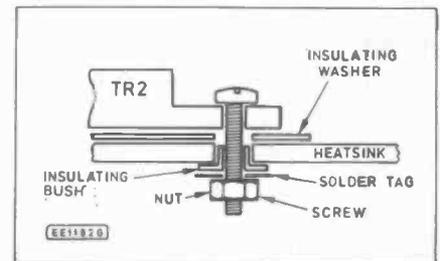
Details of mounting the MOSFET device on the heatsink.
